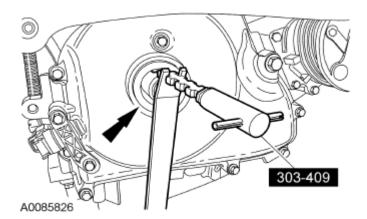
Removing Crankshaft Front Oil Seal Courtesy of FORD MOTOR CO.
